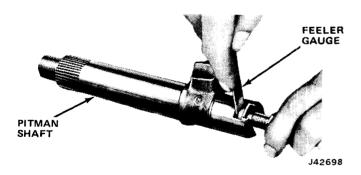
Measuring Pitman Shaft Adjuster Screw End Play
